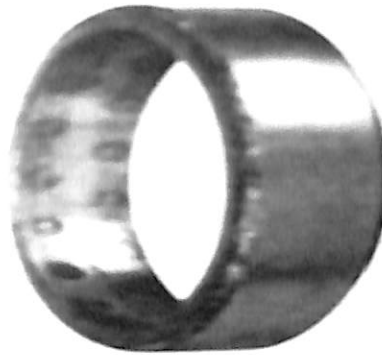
Corrosion marks in the outer ring of a self-aligning ball bearing.
